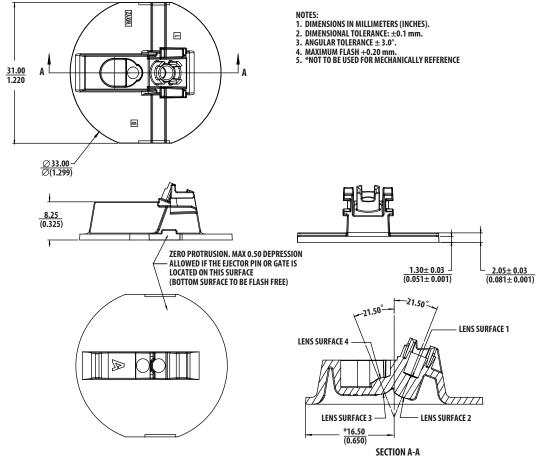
ADNS-6120 laser mouse round lens outline drawings and details.
